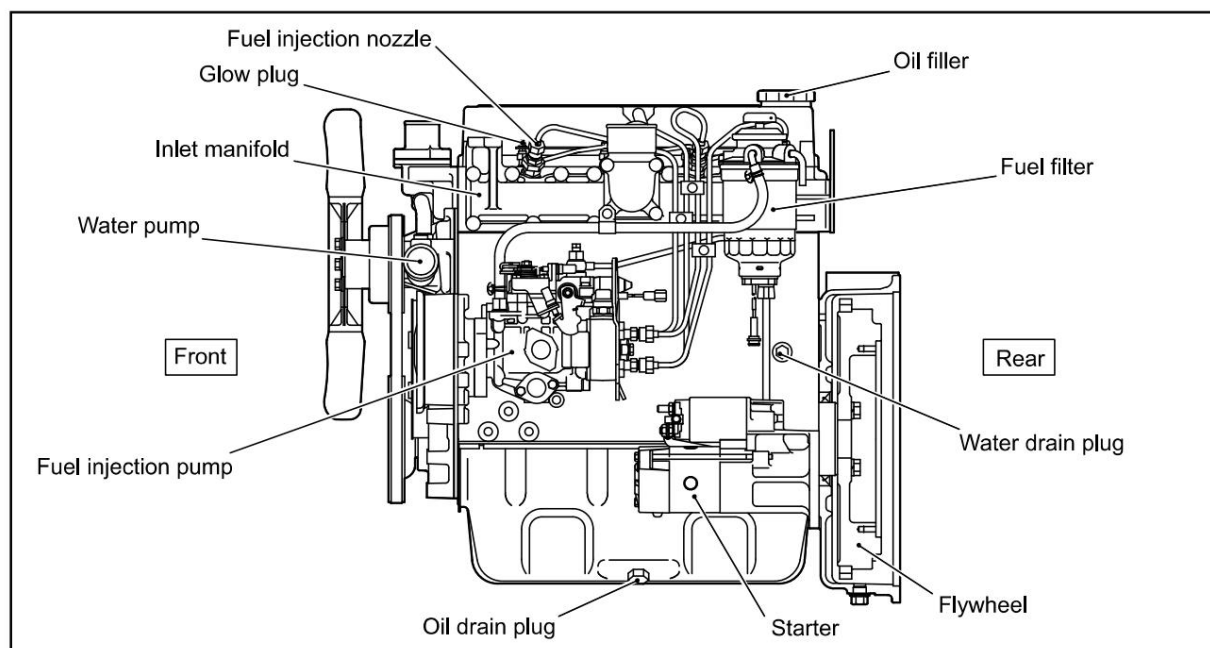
Engine left view (S4Q2 distributor-type fuel injection pump)
